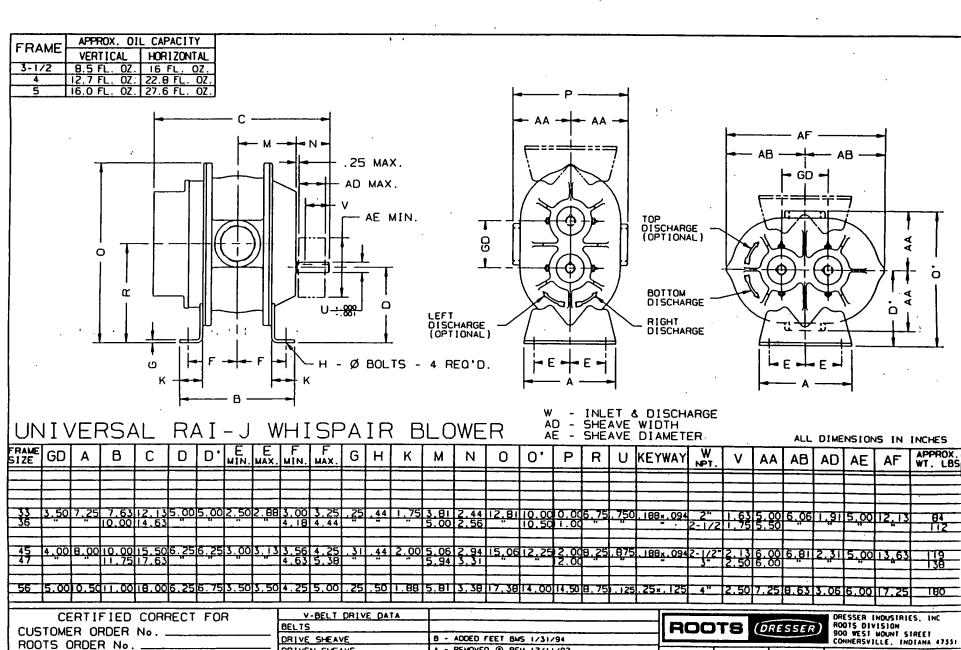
A – Dimensional Assembly of UNIVERSAL RAI-J® Blower (21/2"-5")
